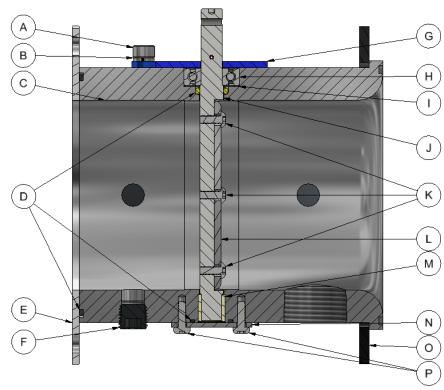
Cross-section of a PBA10.089A-Uxxxxxx
